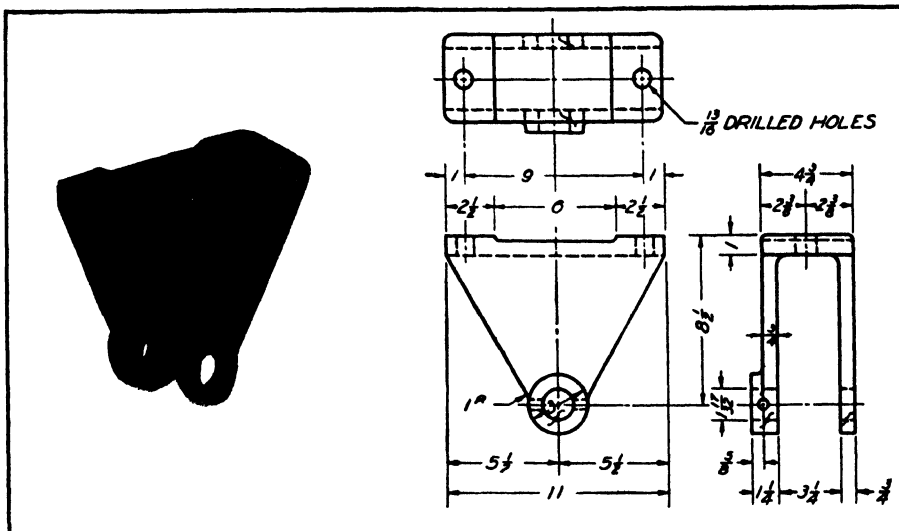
Cast sheave housing. Prob. 422. (Wellman Engineering Co. and The Lincoln Electric Co., Cleveland, Ohio.)
